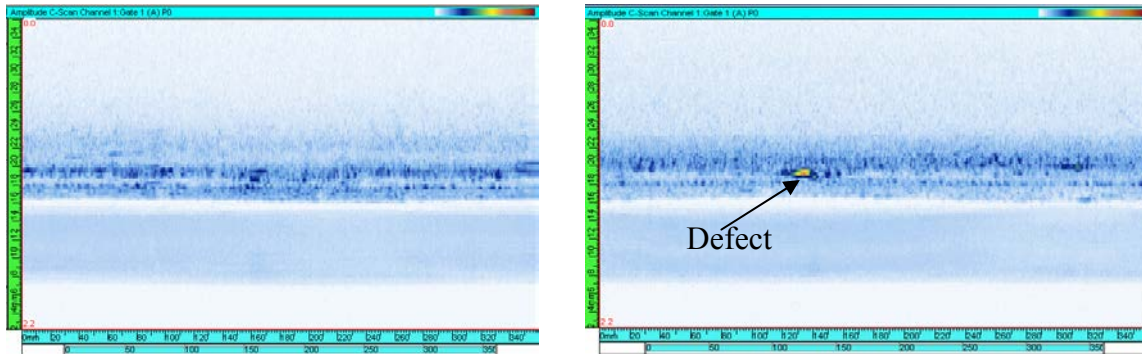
Images of weld regions of the end plug welds obtained by ultrasonic phased array technique.
